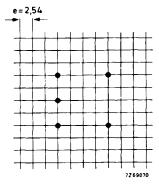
Hole pattern for mounting on a printed-wiring board, hole dia 1, 3 + 0, 1 mm
